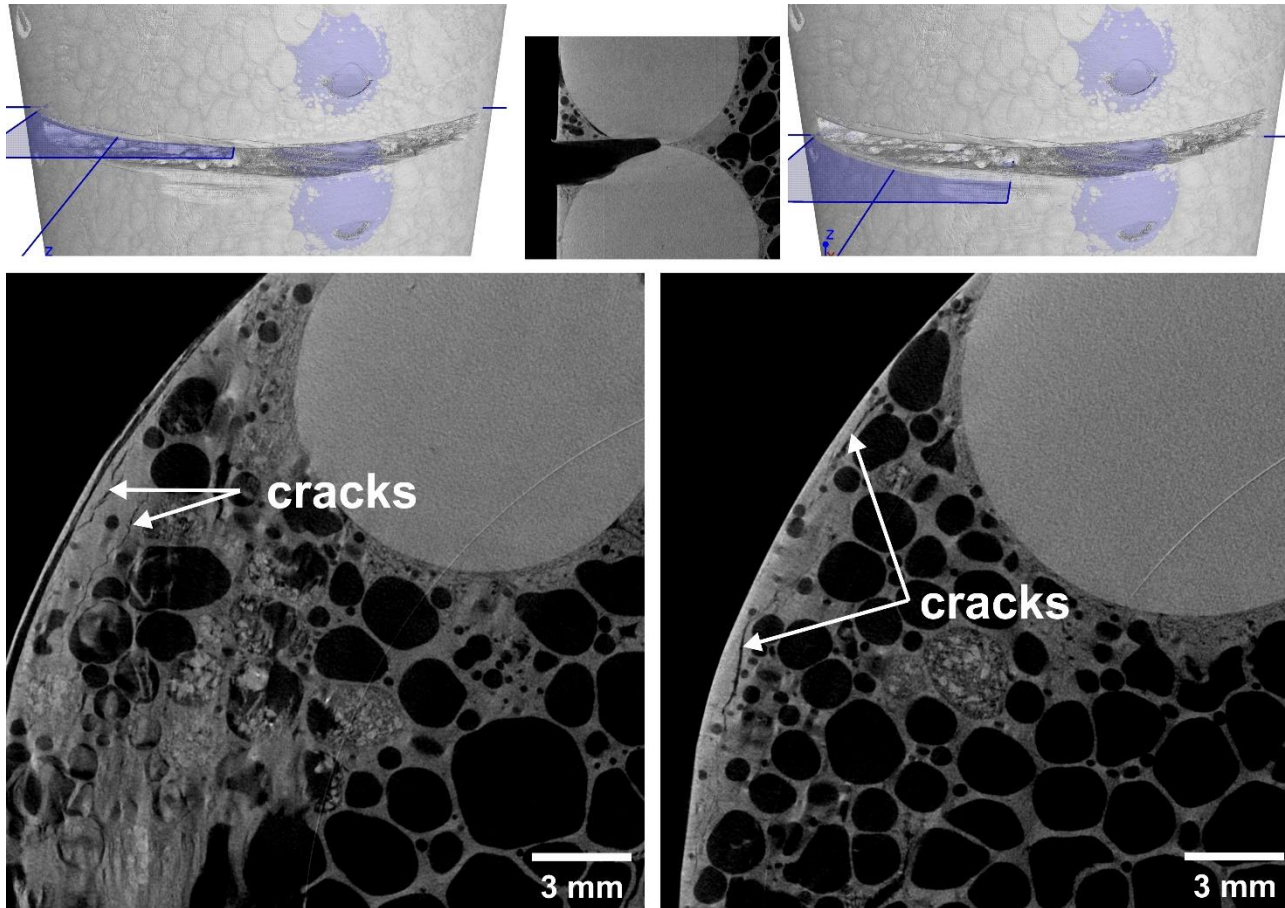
Vibration-induced cracks inside the aluminium foam matrix adjacent to the cut between two spheres inside the cylinder obtained from CT scan
